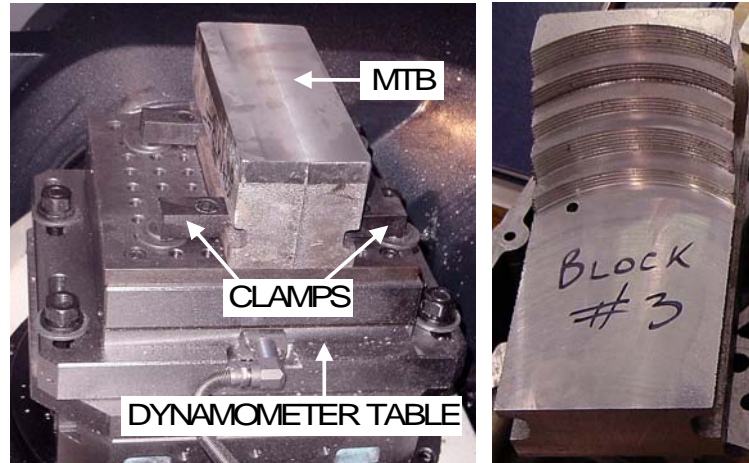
MTB setup on the dynamometer table prior to the face milling operation and the post face milling operation. Machining steps described in Figure 45 are clearly visible.
